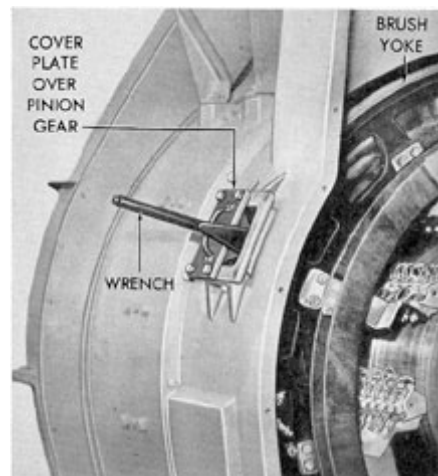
Wrench and pinion gear installed for rotating G.E. main generator brush rigging.
